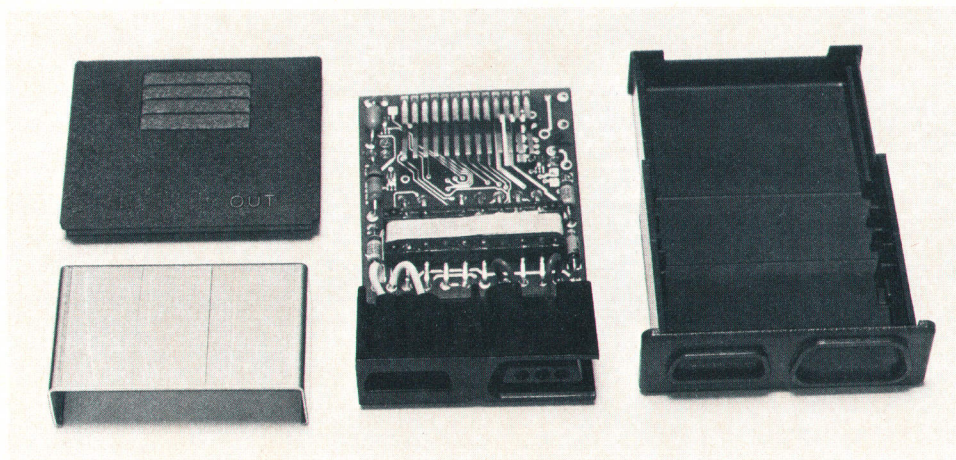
Exploded view of the 82401A HP-IL Interface Module for the HP-71B.
